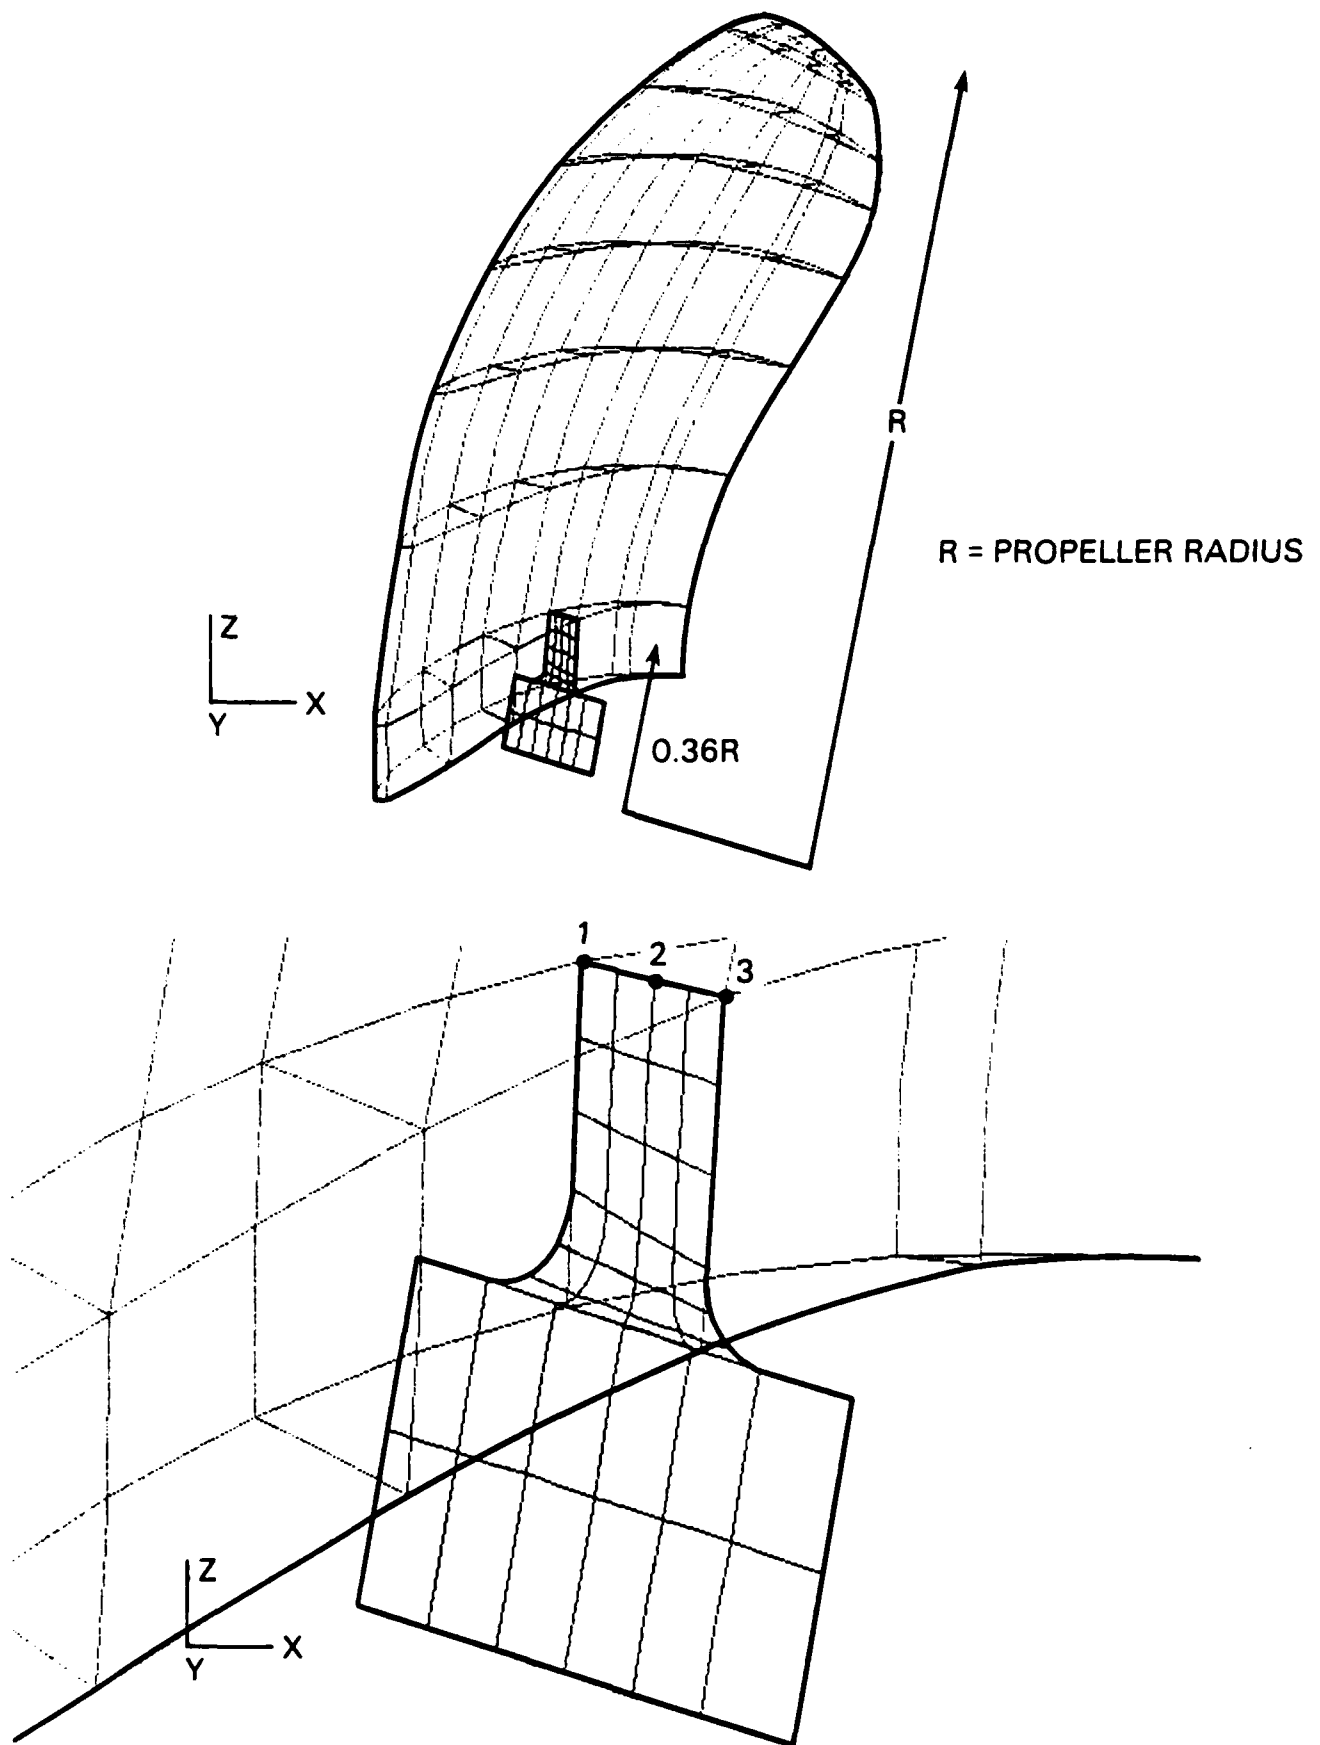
2D blade, hub and fillet model superimposed on a 3D propeller blade model composed of 40 CIHEX2 elements.
